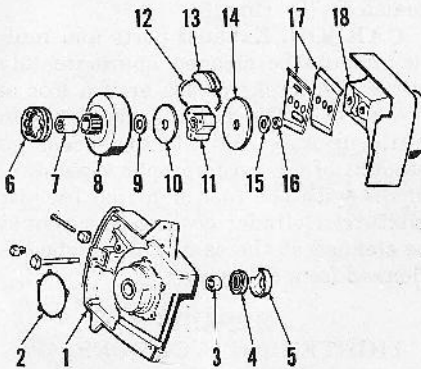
Exploded view of clutch used on models with automatic chain oiler. Parts shown in Fig. PR4-4 are located in main bearing housing (1) shown above.
